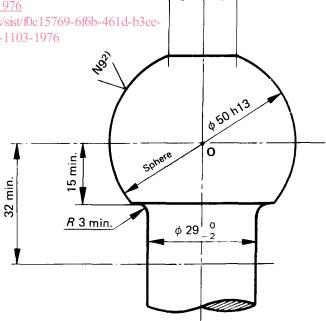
Dimensions and tolerances of the coupling ball
